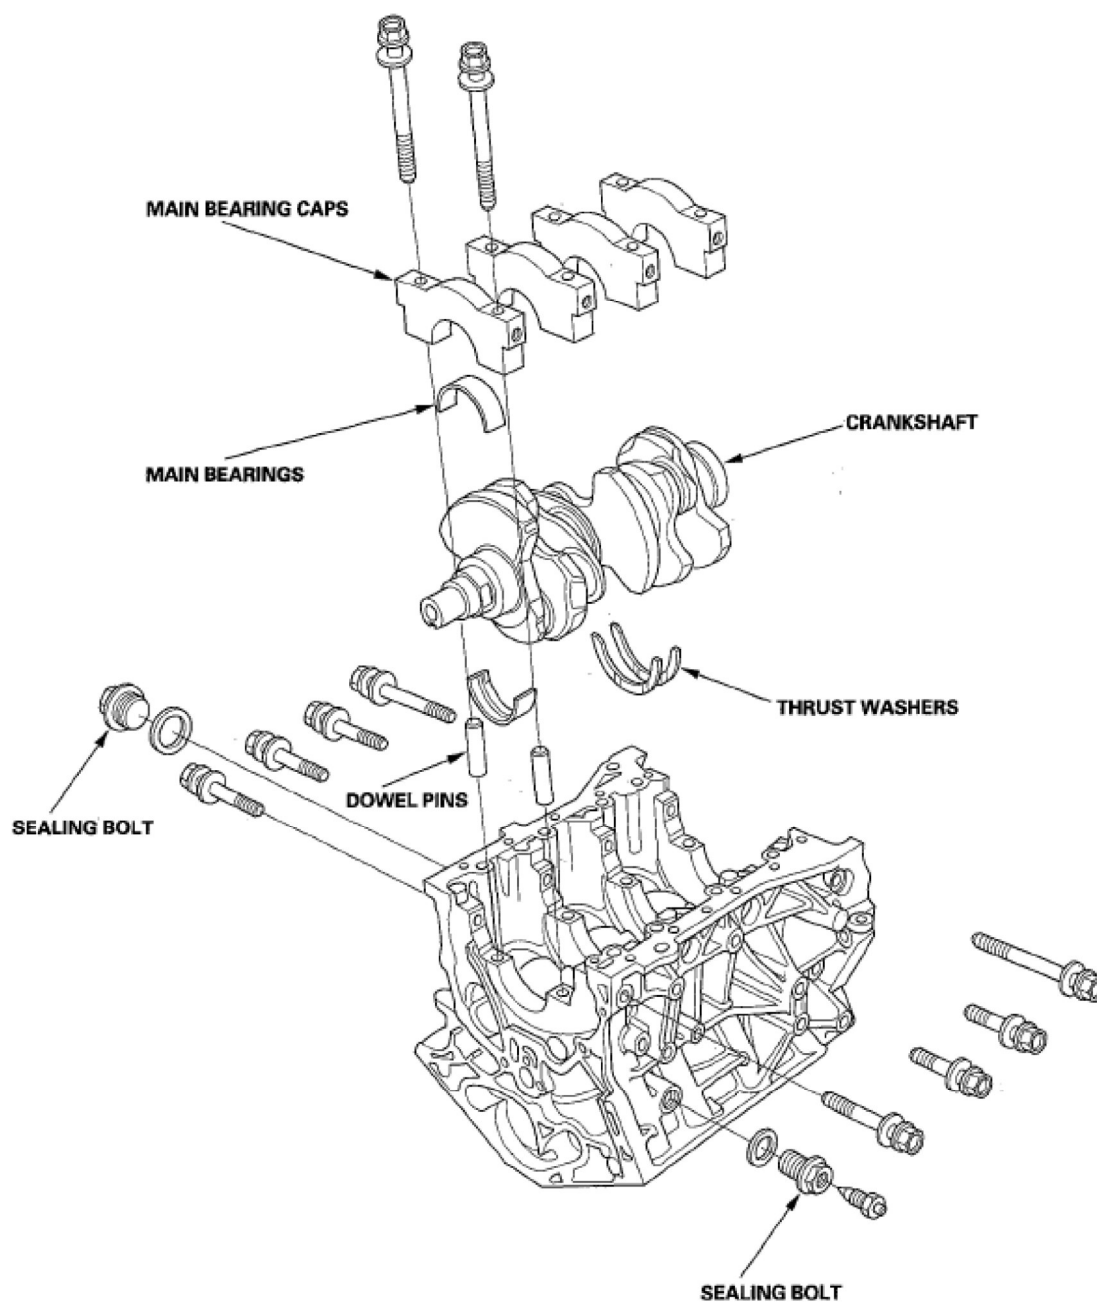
Identifying Engine Block Component Location - J35A6 Engine
